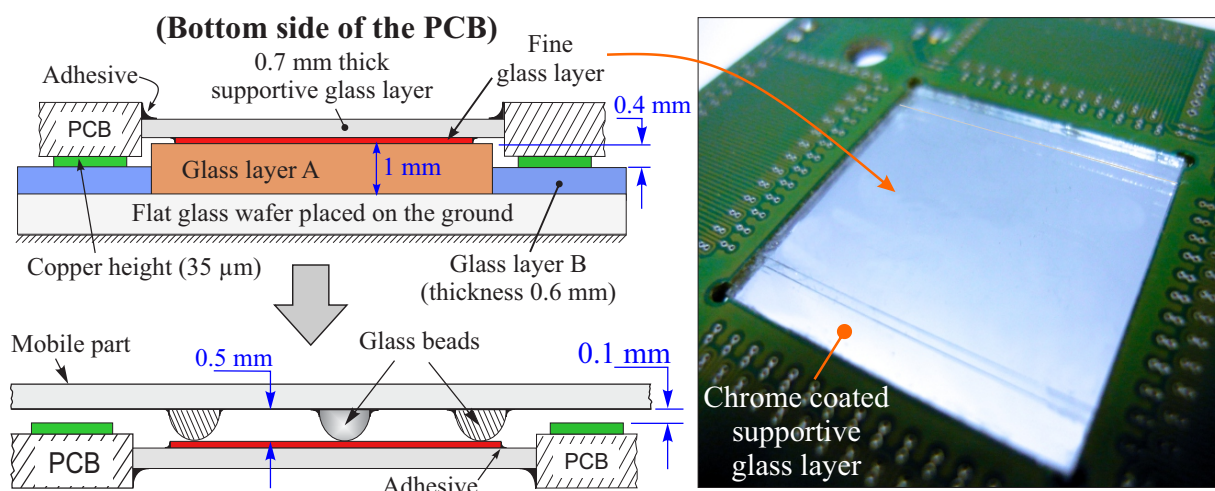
Assembly of the set of glass layer into the PCB through cavity
